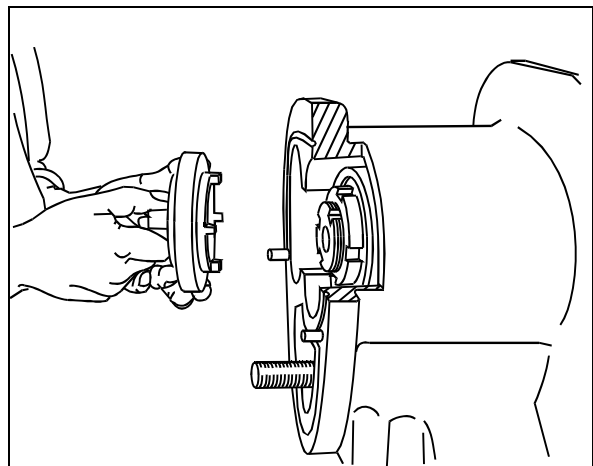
Applying the grooved nut wrench T5 to unthread the grooved nuts (23) of the axial bearings
